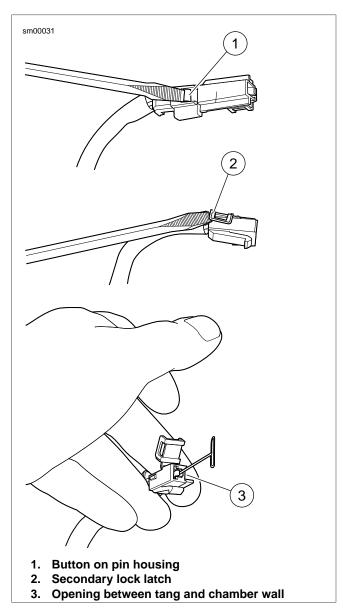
480 Metri-Pack Connector: Remove Socket Terminal
